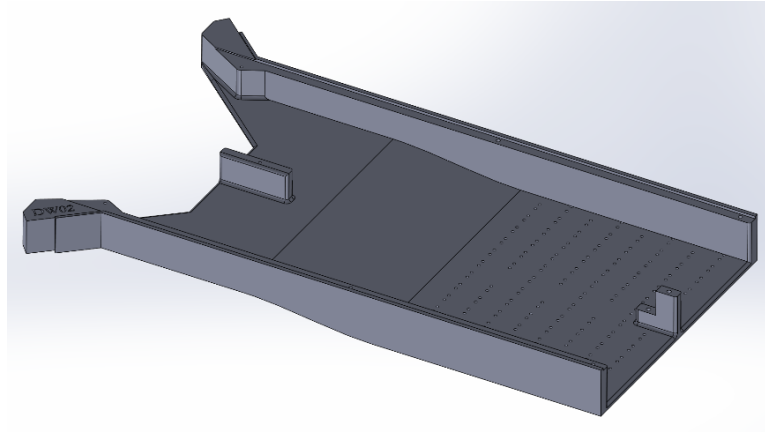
A CAD drawing of the Hodoscope delta wing section that would be connected to the thin layer of the detector.
